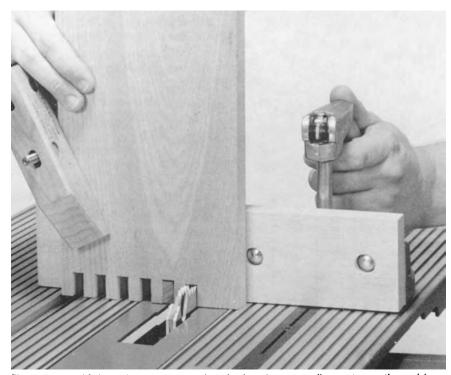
Make subsequent cuts by placing the preceding cut over the guide.
